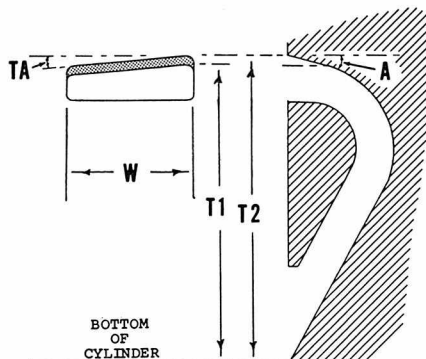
Raising the transfer ports will cause ports to open sooner. Angles of passage (A) and port (TA) direct fuel into cylinder and should be closely maintained.
